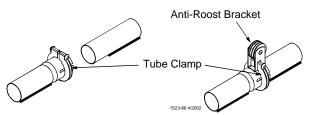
Tube Clamp & Clamp/Anti-Roost Bracket
